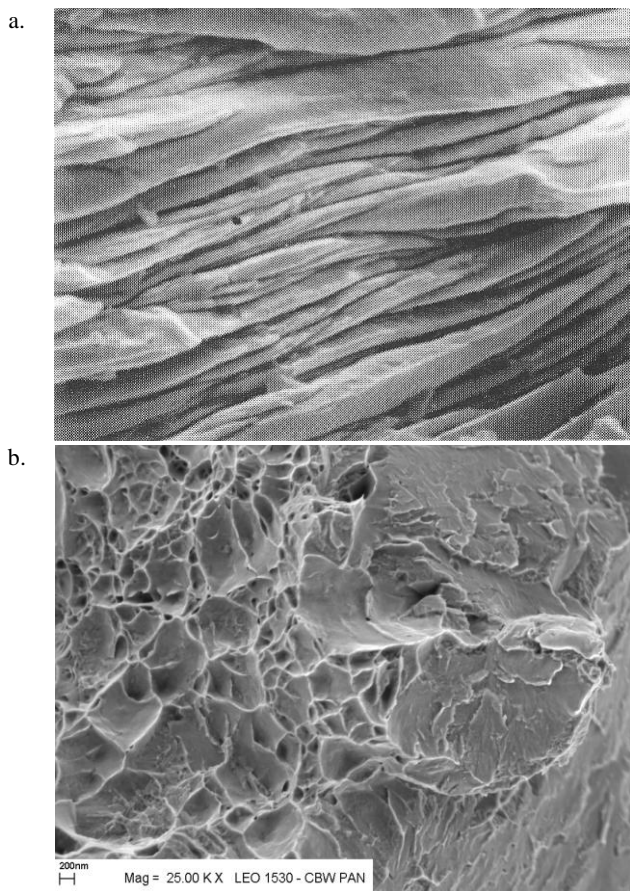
The morphology of fracture surface of ADI austempered at: a – 275°C and b – 360°C
